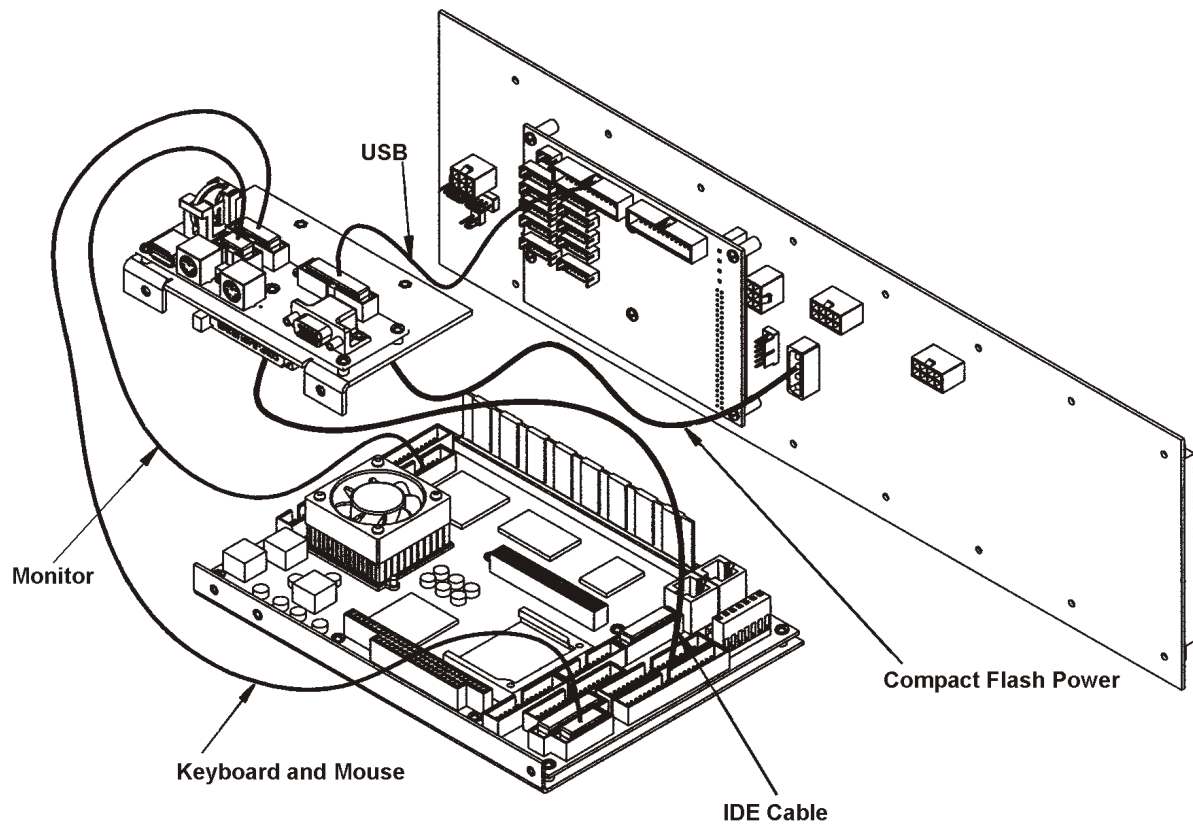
SPCENCL3200 Internal Cable Connections, Part 2
